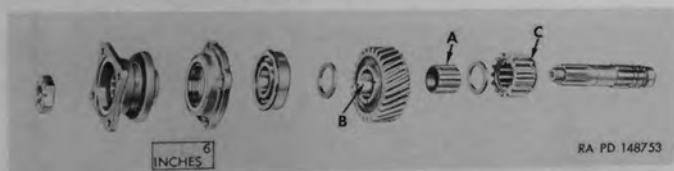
Repair and rebuild standard points of measurement for transfer input shaft components
